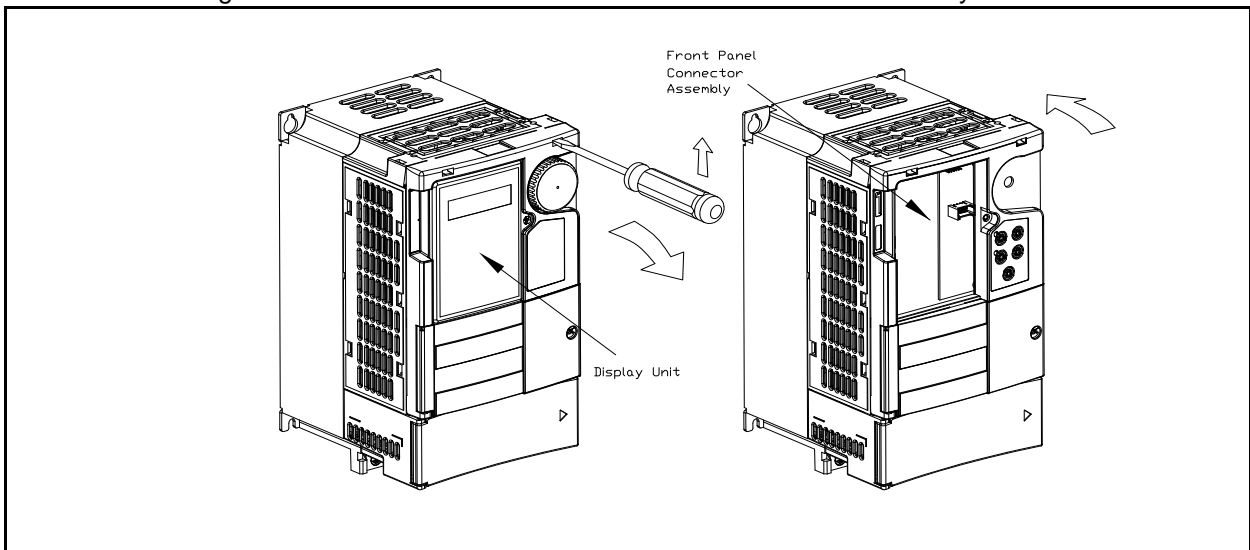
Front Panel Removal/Front Panel Connector Assembly.
